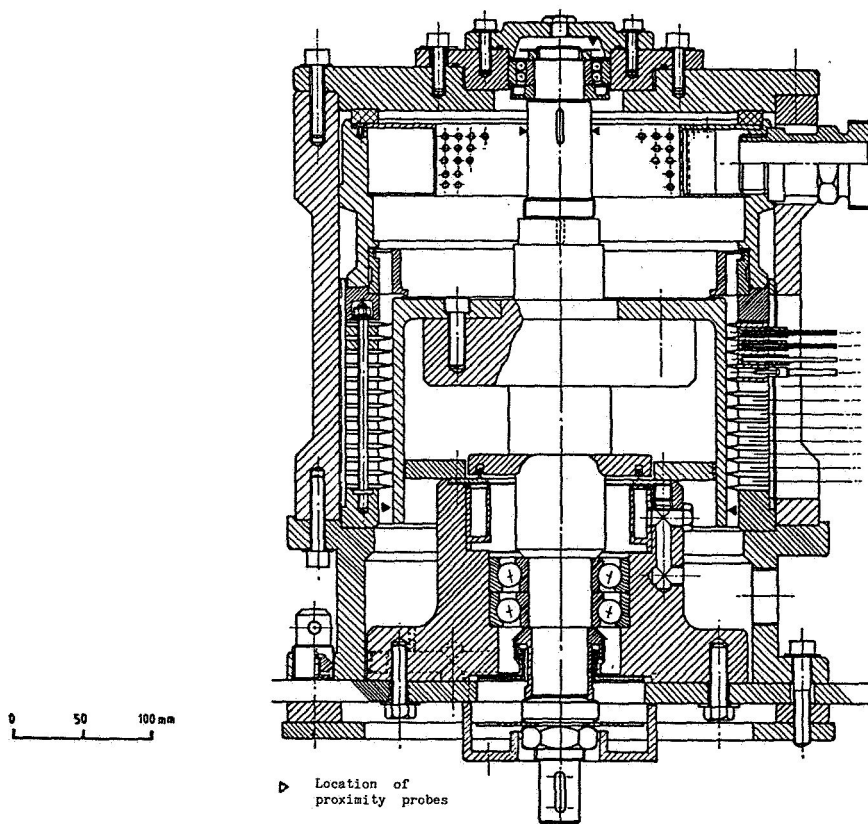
Sectioned assembly drawing of test rig (main assembly)
